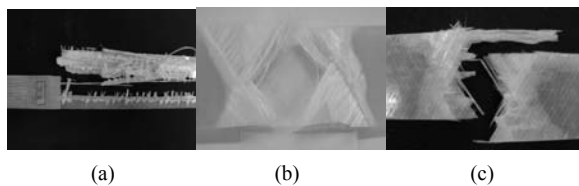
Fracture surface for (a) UD; (b) BD; (c) TRI composites.
